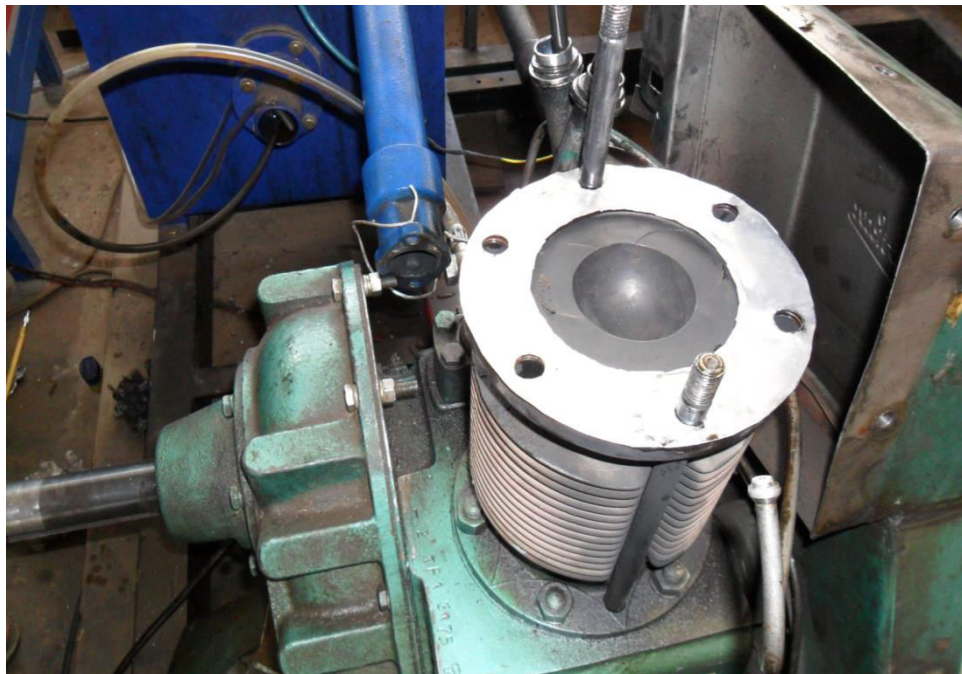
(a) Lower thickness gasket fitted with cylinder block
